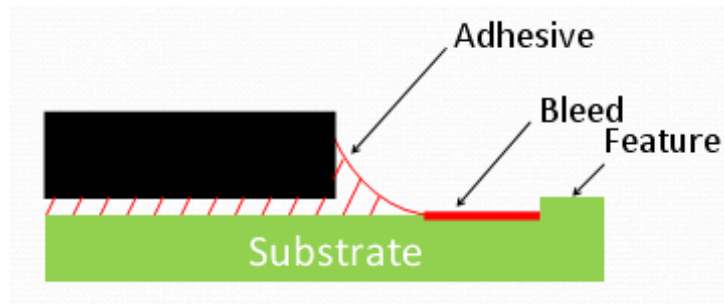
Epoxy bleed control by a laser machined barrier.
